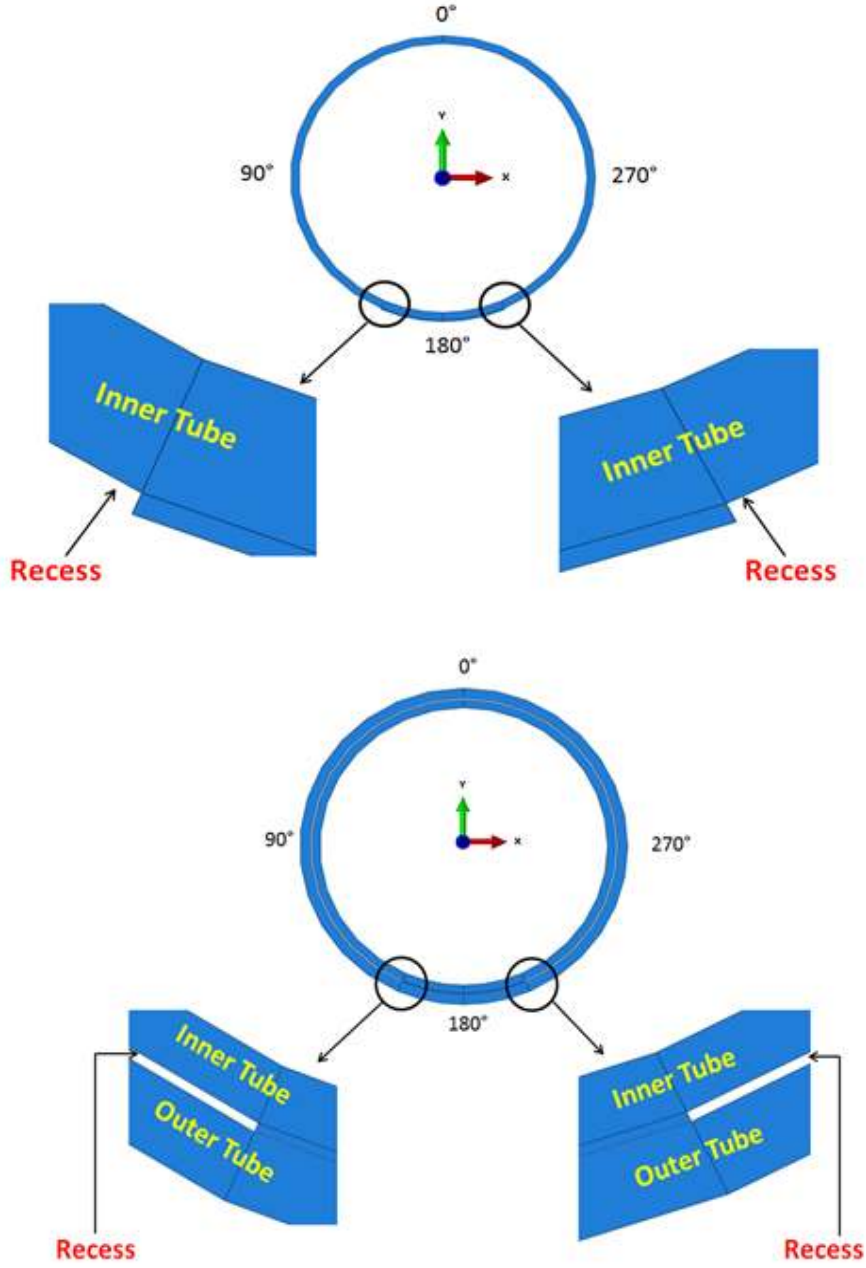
Numerical model setup showing the inner tube and outer tube assembly
